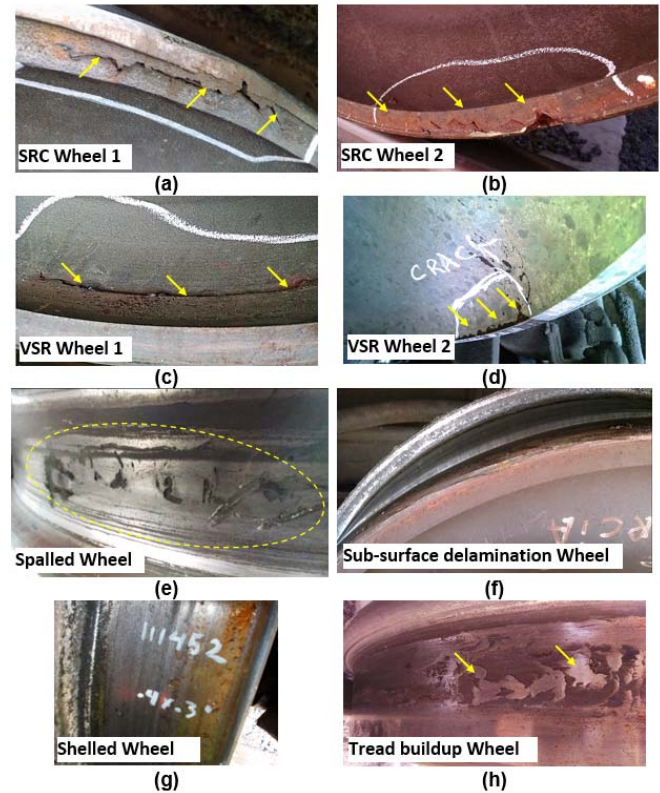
Defective Wheels Installed in Cracked Wheel Consist
